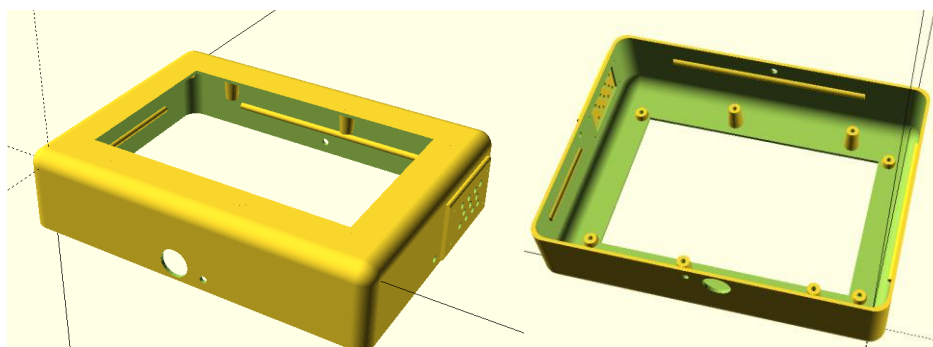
3D-printed Front Case: Top View (Left), Bottom View (Right)
